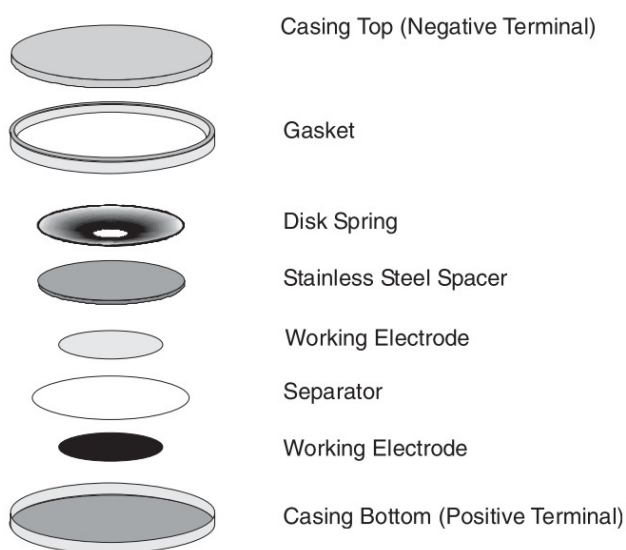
An illustration of the coin-type cell parts and assembly. [150]
